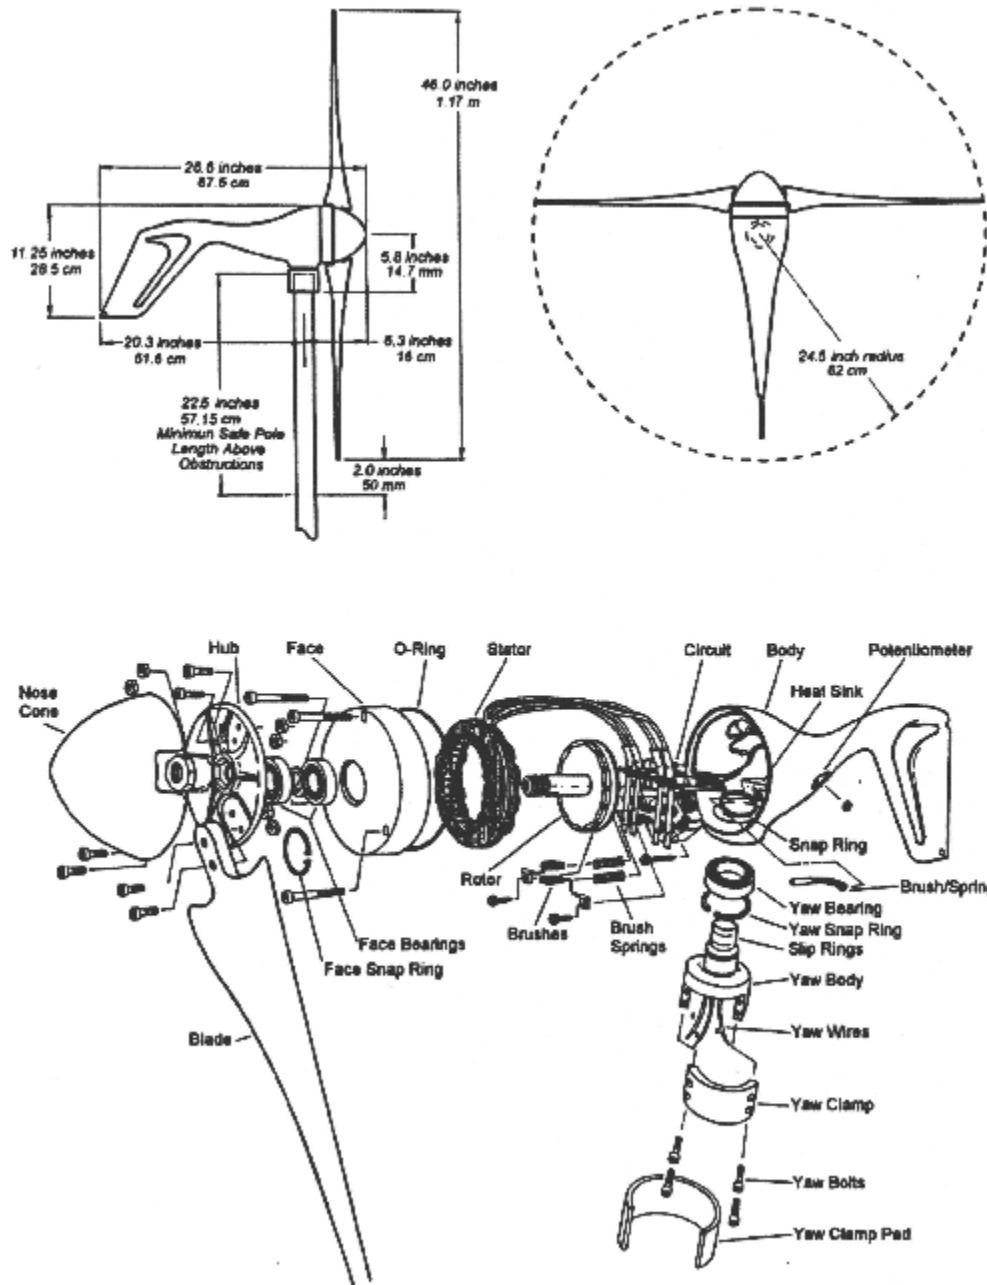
Exploded view of the components of the Air-X 24 wind generator.
